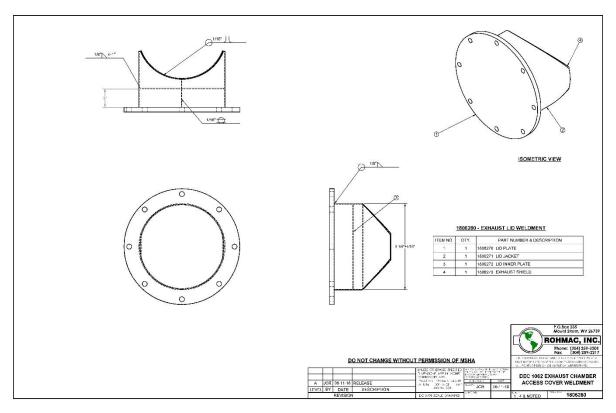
Revised Diesel Power Package Exhaust Lid Drawing
